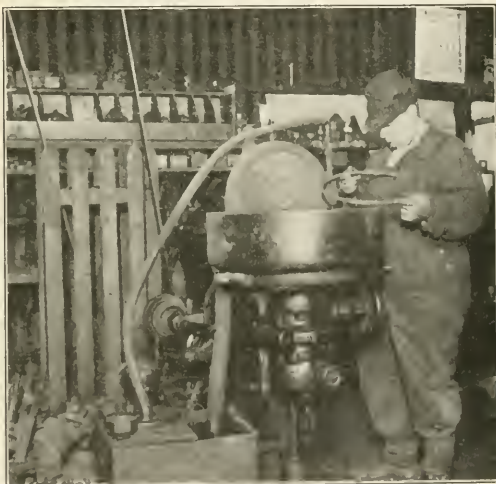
Inspecting An Air Compressor Ring After Being Ground
